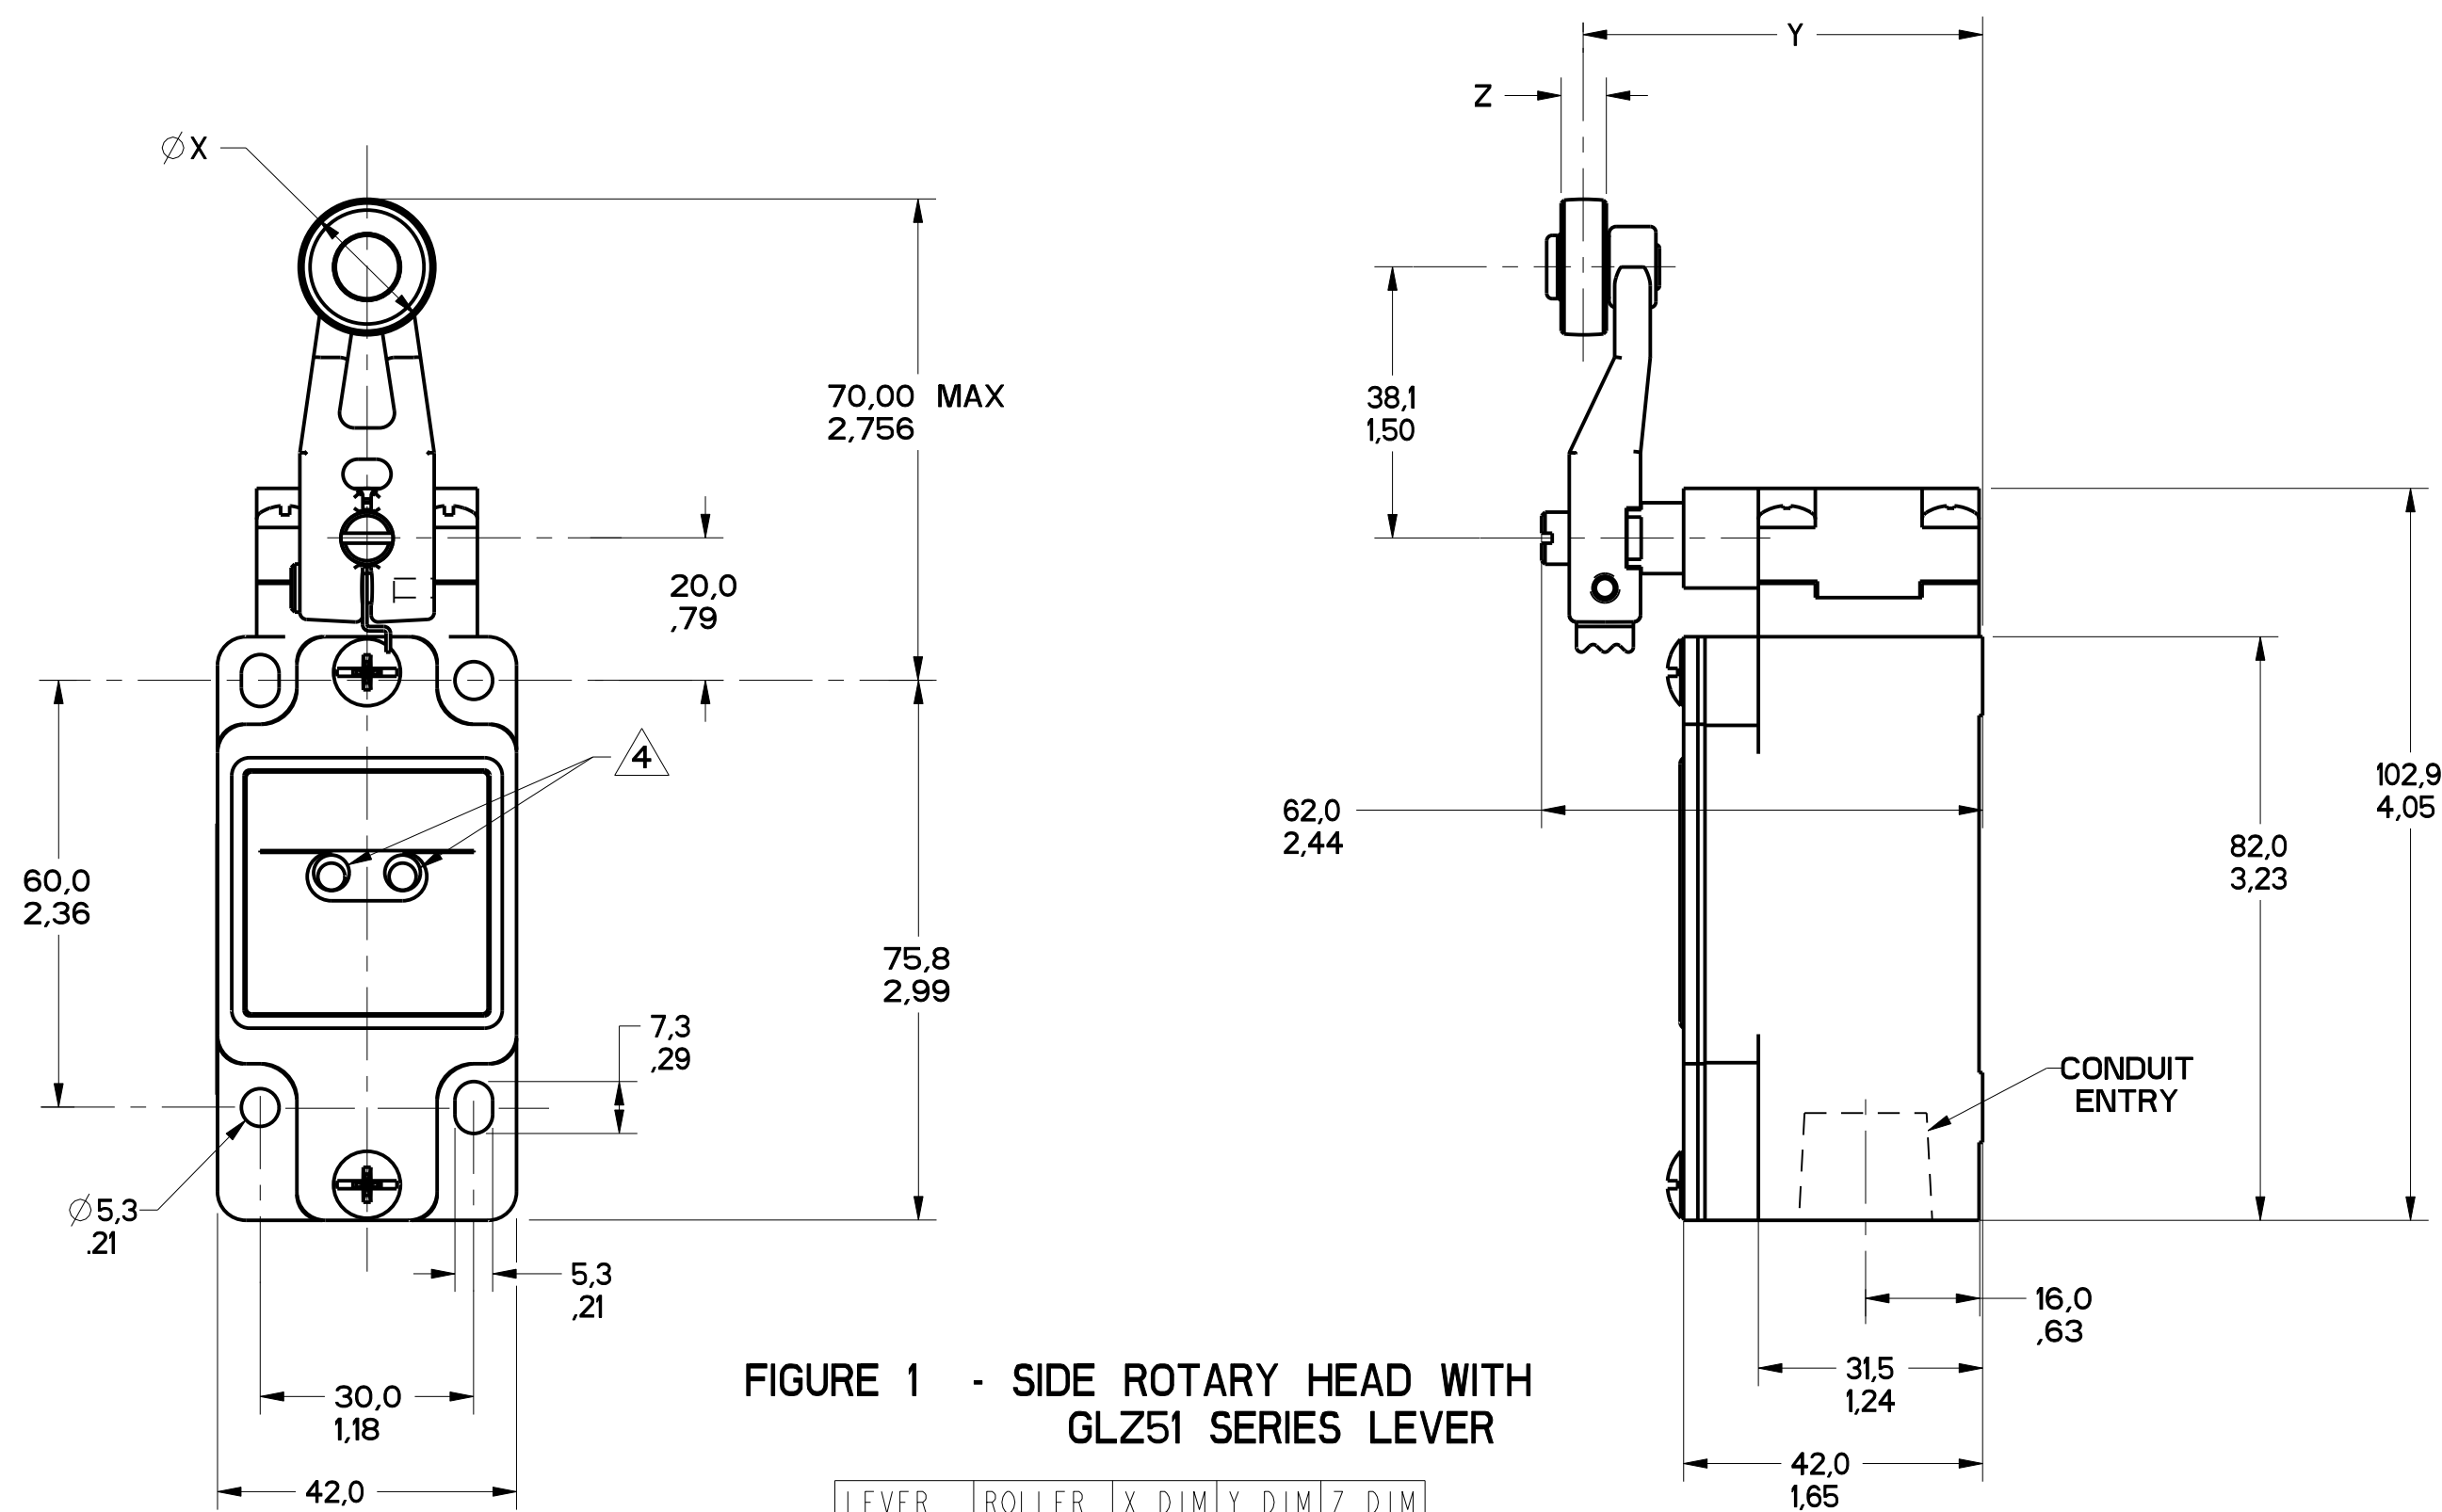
SIDE ROTARY HEAD WITH GLZ51 SERIES LEVER
